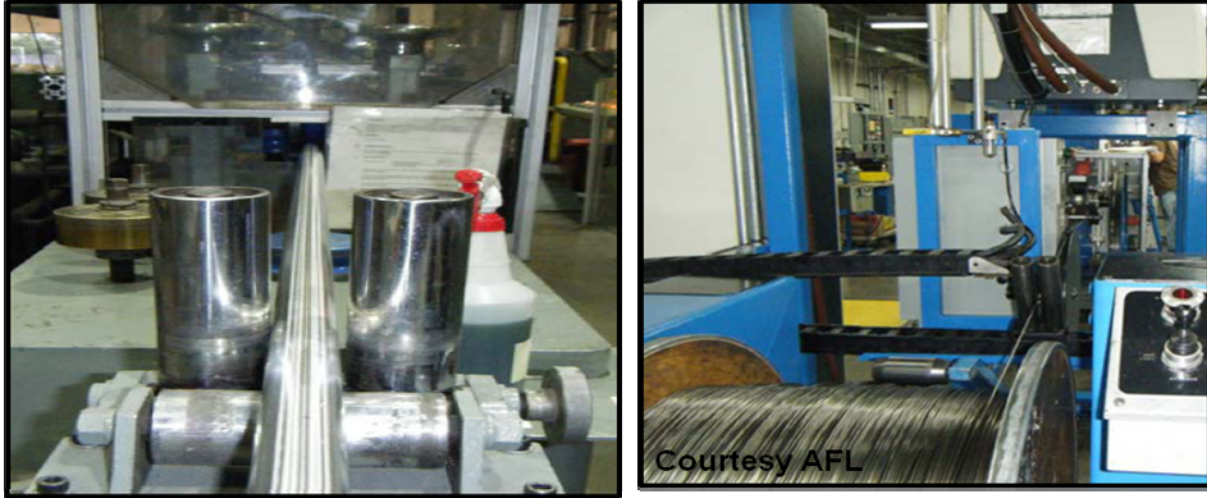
FIMT Manufacturing equipment. Courtesy AFL.
